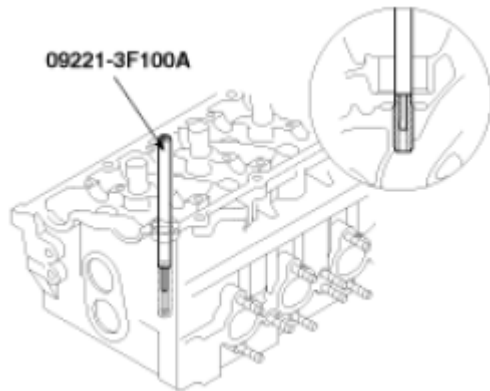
Inserting Valve Guide From Downside Of Cylinder Head Assembly
